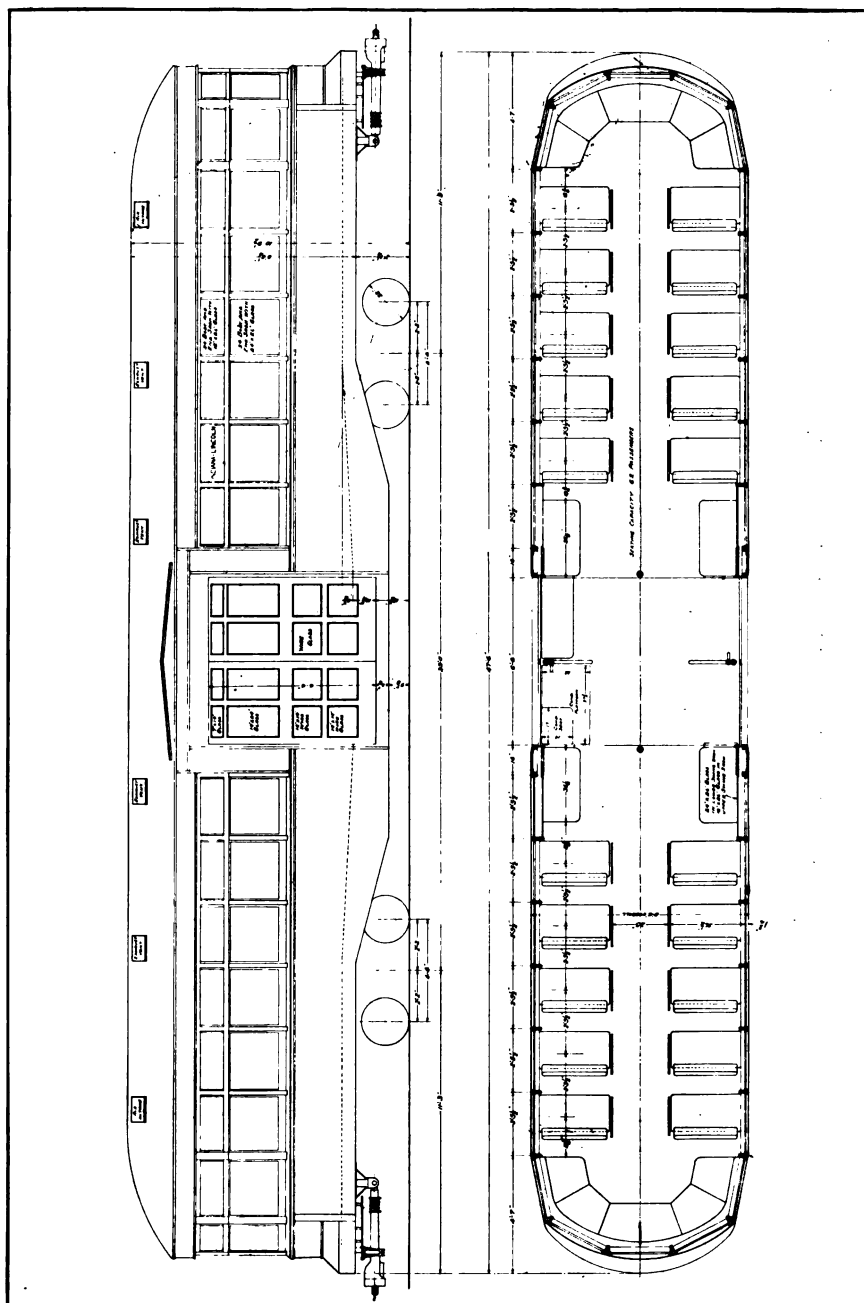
Side elevation and sectional plan of double-truck trailer, showing principal dimensions and seating arrangement. (See page 101.)
